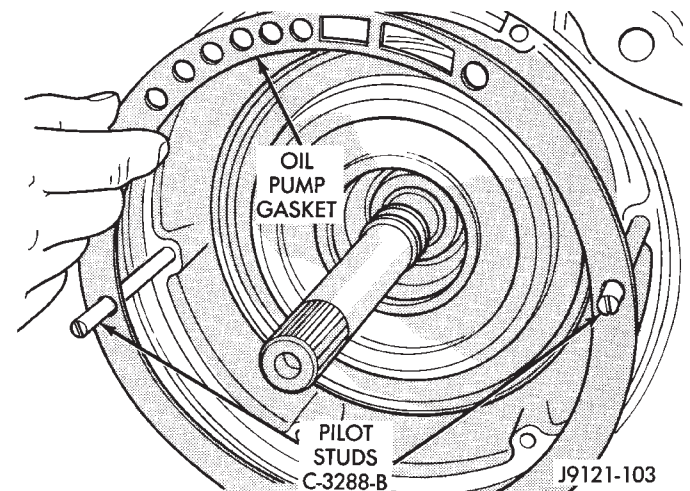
Oil Pump Gasket And Pilot Stud Tool Installation
